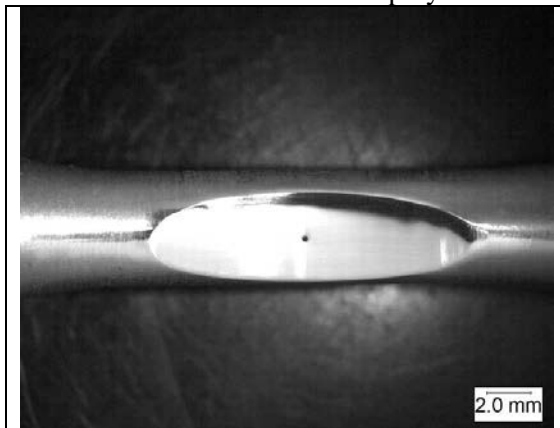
Polished gauge section of a fatigue specimen showing an EDM notch to simulate the presence of a spray hole. The axial loading direction in this view is horizontal.
